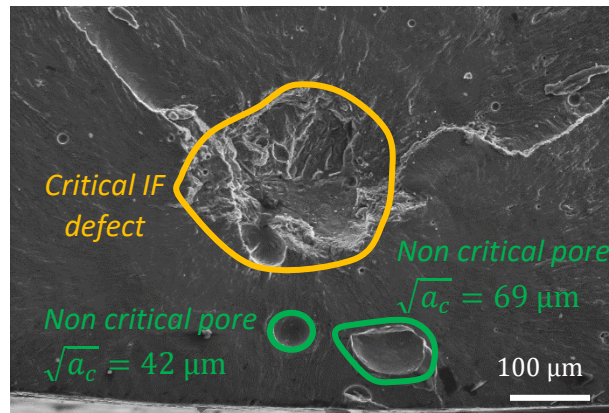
Fracture surface of a GV specimen showing a critical IF defect and two non-critical pores with smaller size.
